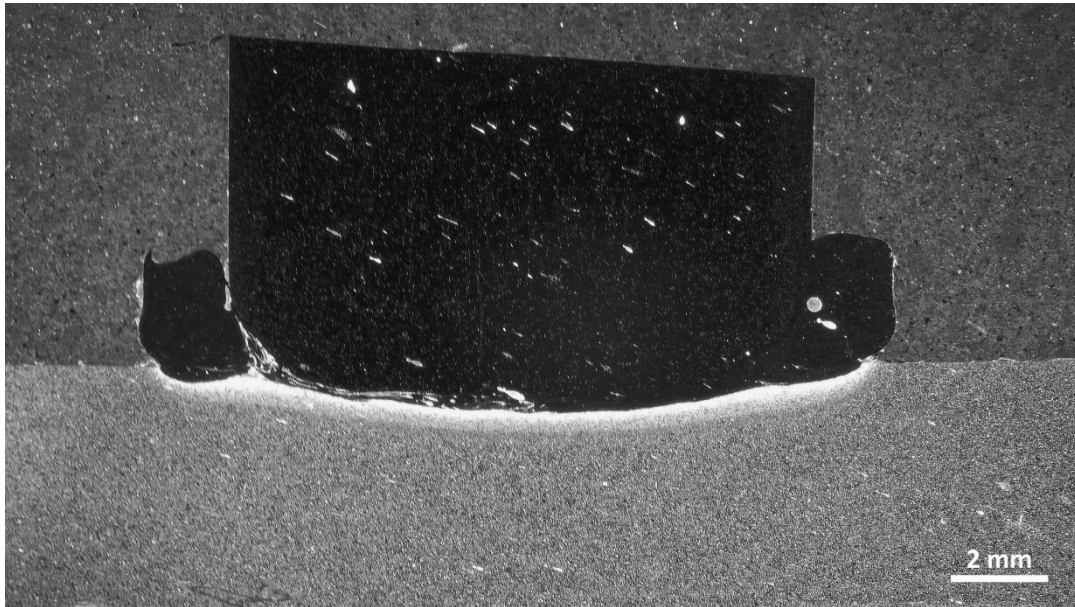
Macrostructure of the welded joint No. 5
